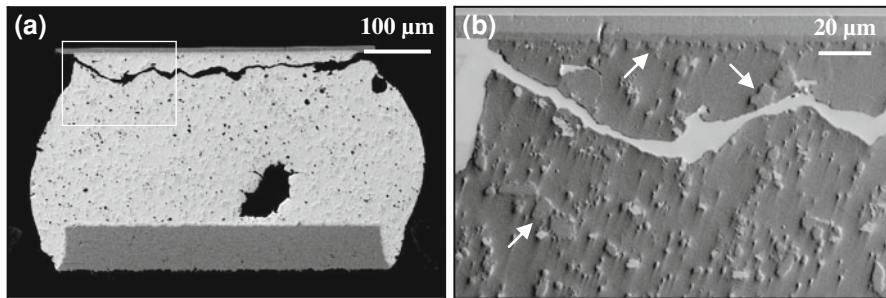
BSE images of a cross-section through a Sn-0.7%Cu-0.1%Ni solder joint that failed after 434 cycles of thermal cycling between -40°C and 125°C. a Overview of the solder joint, which has failed due to the propagation of a fatigue type of crack. b Detail of the area inside the white *frame* in Fig. 2.38a. The *arrows* indicate IMC particles, which have mainly the (Ni, Cu)₃Sn₄ composition. Data from imec
